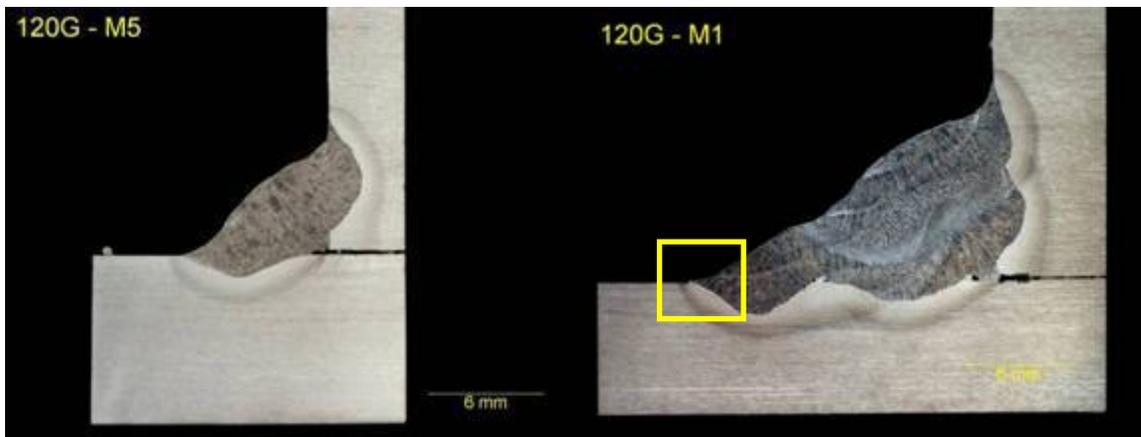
Macros of GMAW Welds on X120 Pipeline Material
